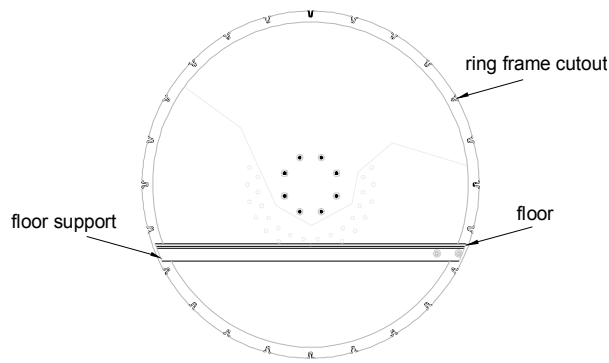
End view of ATC showing ring frame, honeycomb floor, and floor support.
